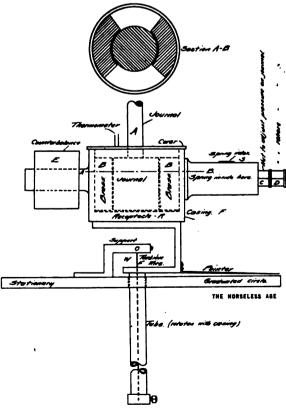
KINGSBURY OIL TESTING MACHINE.
